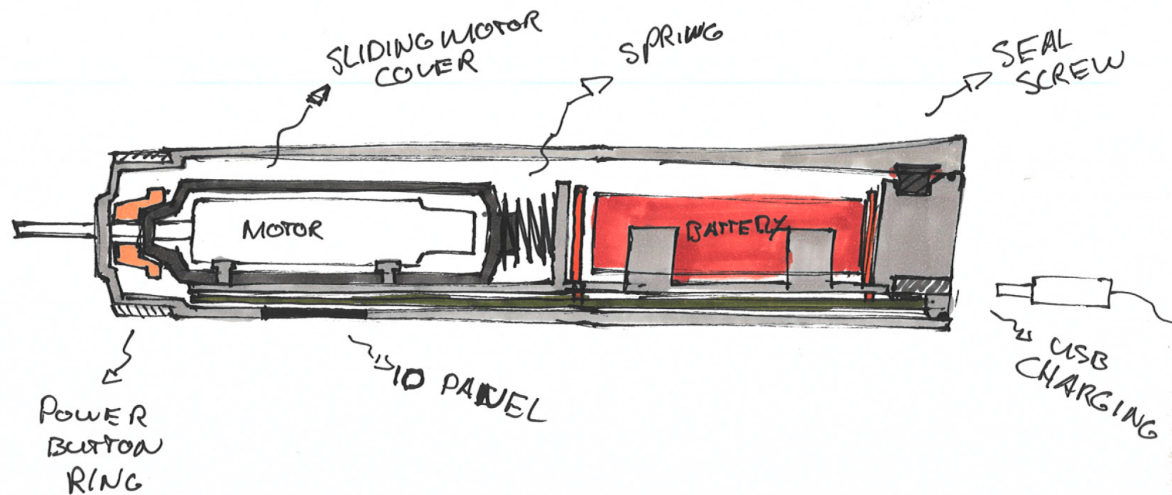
View of the internal configuration of the full metal concept. The motor housing is fixed in a way that allows it to slide. The spring pushes out part of the internal carriage when the seal screw is loosened.
